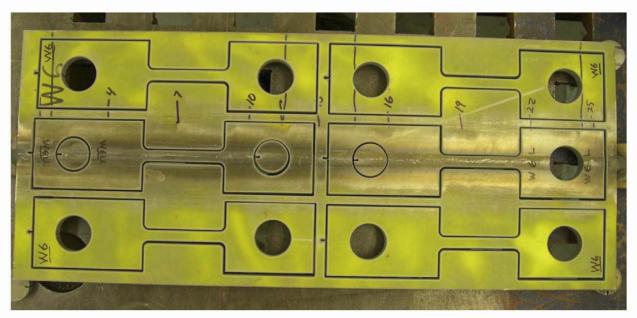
Material impact test specimens (D-4-4) water jet cut from welded plate W6.
